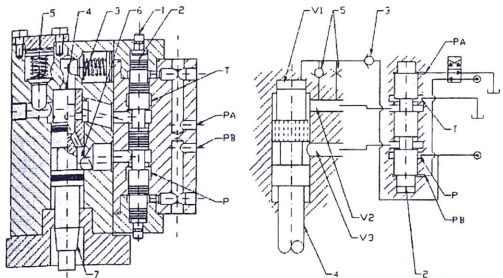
Schematic view of an electro-hydraulic valve actuator
